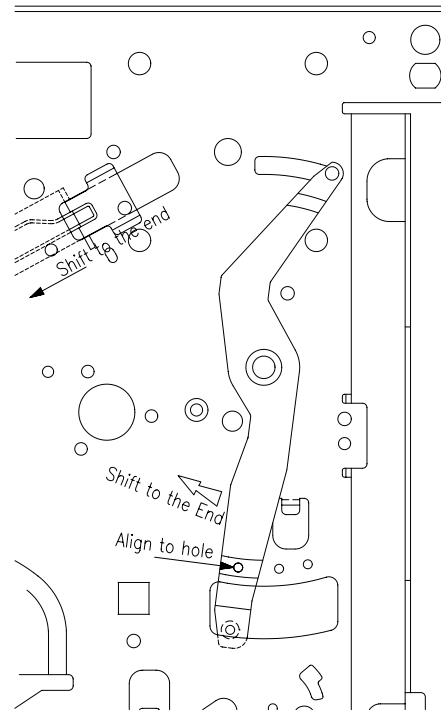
Assembly of the CAM GEAR, RELAY LEVER
